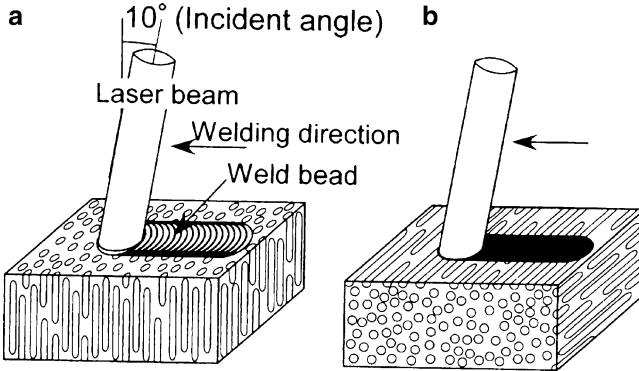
Schematic views of specimens during laser welding in the lotus copper with the pore growth (a) perpendicular and (b) parallel to the work piece surface (Reprinted with permission from [4] © 2003 Elsevier Science B.V.)
